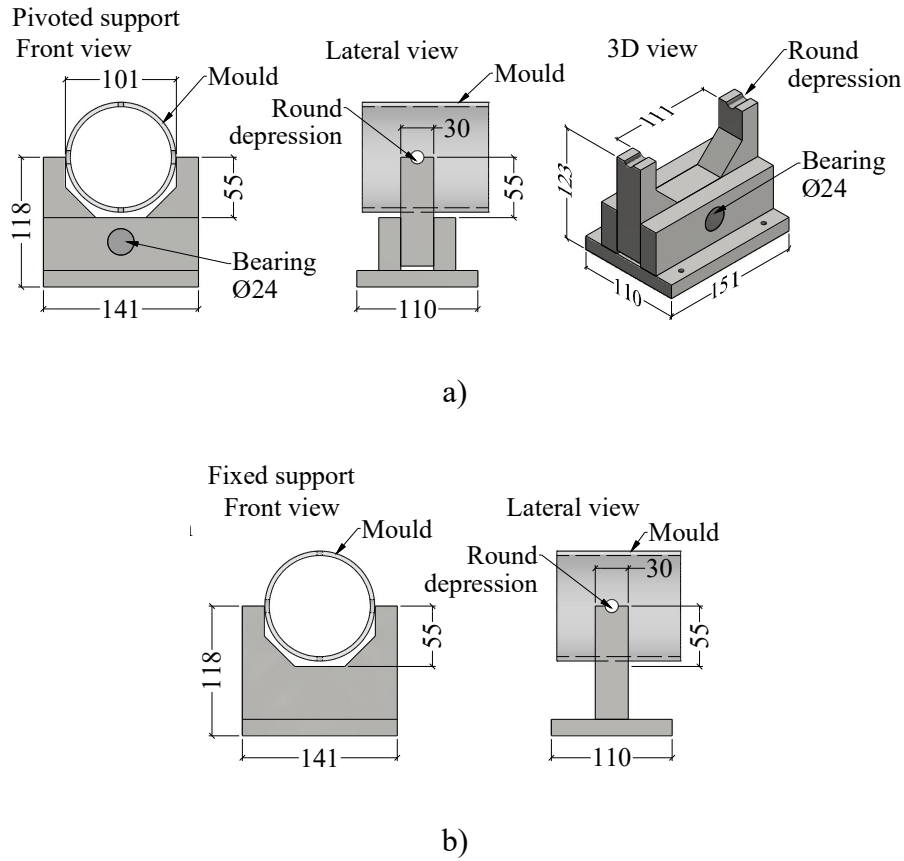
New EMM-ARM steel supports: a) Pivoted; b) Fixed [units: mm].
